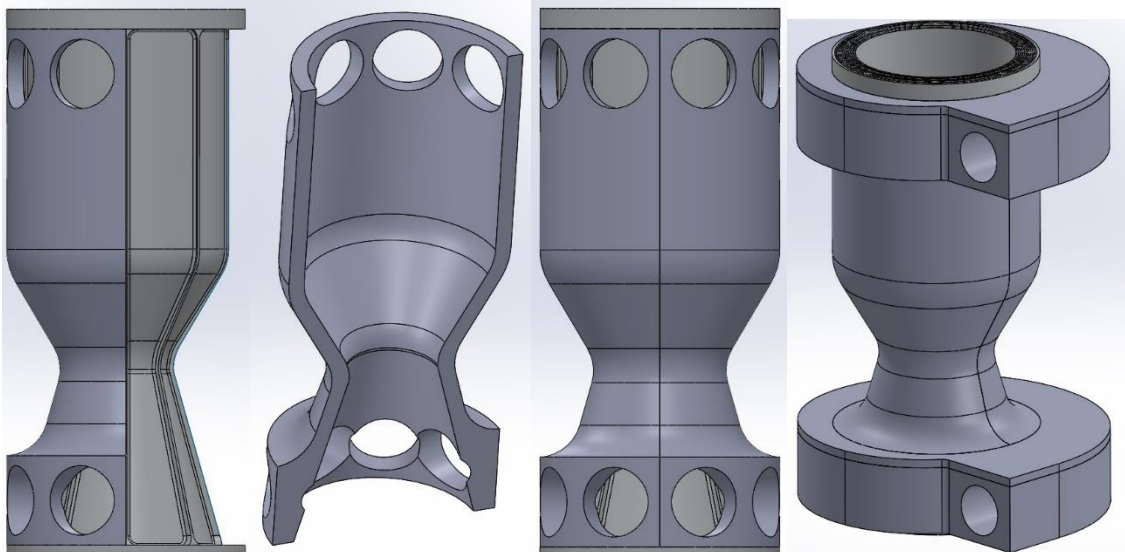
From left to right – chamber with half jacket, isolated jacket half-shell, assembled jacket on chamber, chamber assembled with manifolds.
